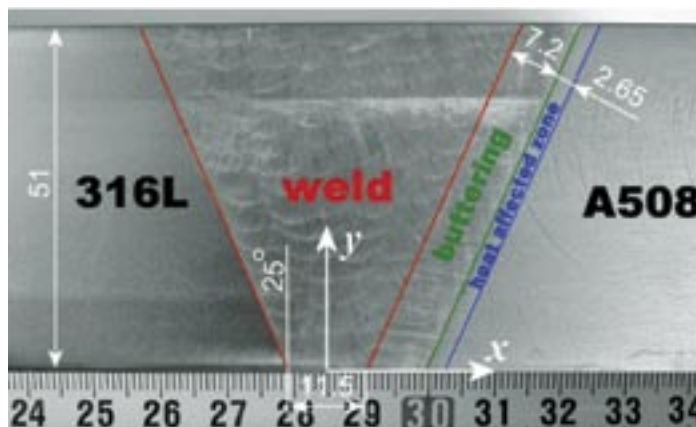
Longitudinal cross-section of the ADIMEW AD01 dissimilar metal pipe weld, showing geometry details and materials involved
